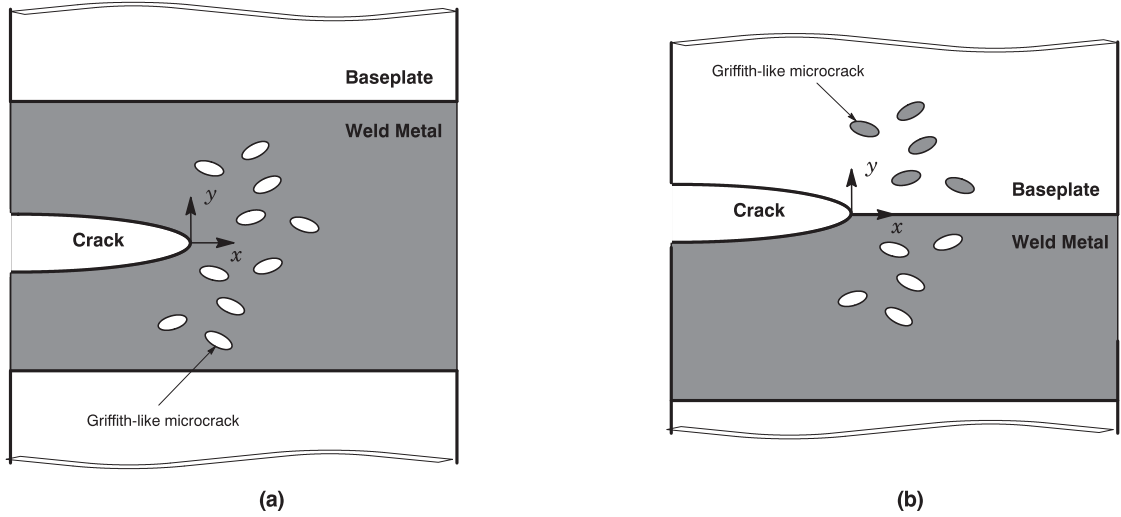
(a) Schematic of a macroscopic crack embedded in the weld metal in which the fracture process zone is fully confined to the weld material. (b) Interface macroscopic face between the weld metal and baseplate material.
